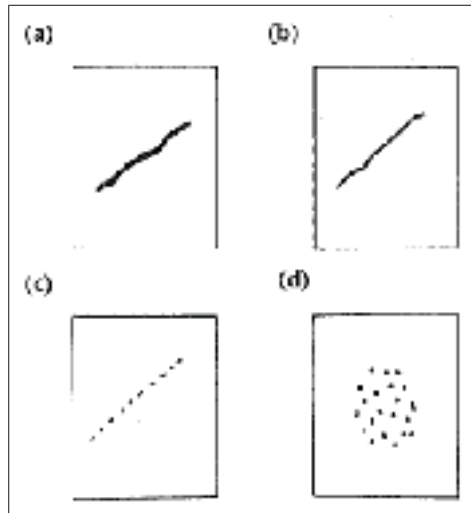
Schematics representing often detected indication patterns. In (a), an opening which may be a surface crack; in (b), a thin indication which may represent a tight open to surface crack or a surface cold shut; in (c), there is a partially welded lap; in (d), the indications rounded in the shape of bubble may be porosities or pits.
